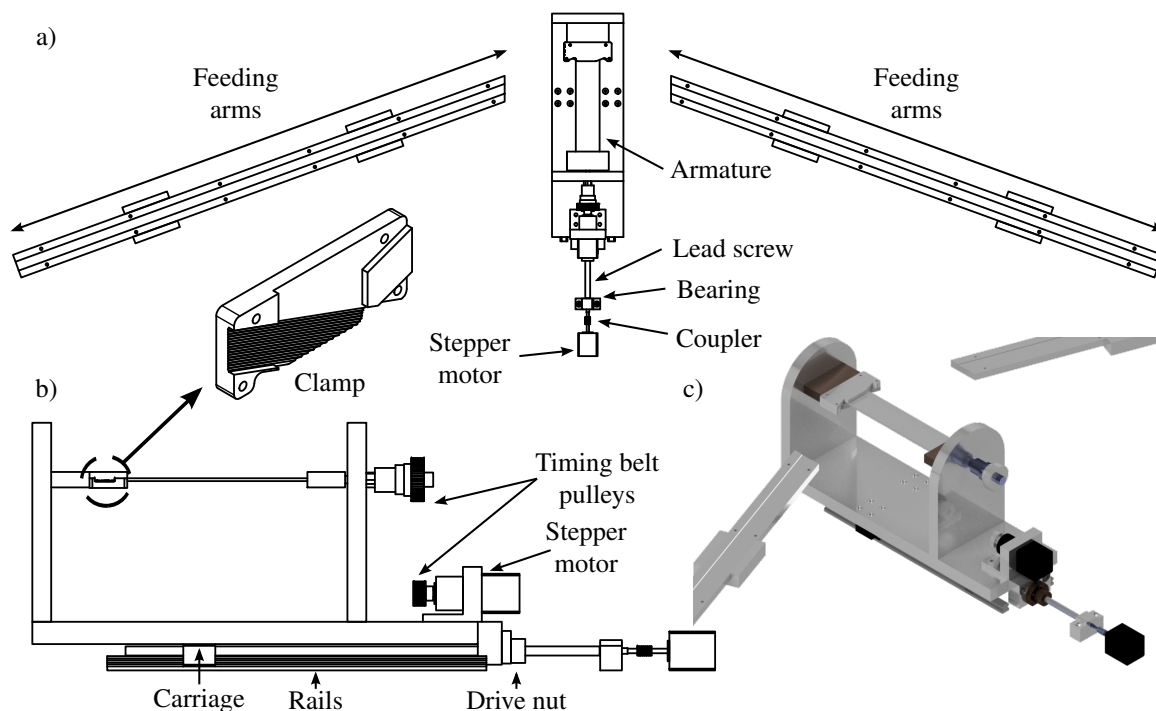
Panel a) shows an over-head view of the motorised coil winder. This view includes the two feeding arms which are used to hold the two sets of 16 wires. The wires are clamped to the armature, a close-up of the clamp has been included. Panel b) shows the side view of the coil winder. The coils can be wound once the wires are clamped to the armature, one set is clamp above the armature, the other from below. The armature is bolted directly to a shaft which is driven by the larger of the two timing pulleys. This is driven by a stepper motor fitted with a gearbox. The shaft of which is fitted with another timing pulley in order to drive the one above with a timing belt. The belt has been omitted from the drawing. The former can also be translated and for smooth motion the winder is mounted on a pair of rails and carriages. A stepper motor is used to drive this motion using a combination of a lead screw and driving nut. The lead screw is supported by a bearing and is linked to the stepper motor by a coupler. A Labview programme is used to simultaneously drive the two motors to ensure that the former is translated by the appropriate amount per revolution. Panel c) shows a render of the motorised coil winder. Original drawings by Paul White.
